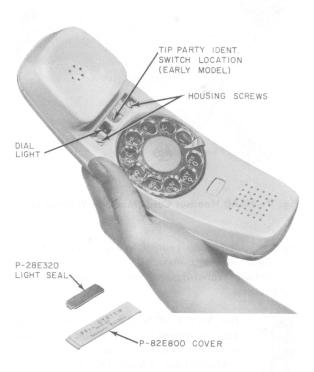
220A Hand Telephone Set, Cover and Light Seal Removed
